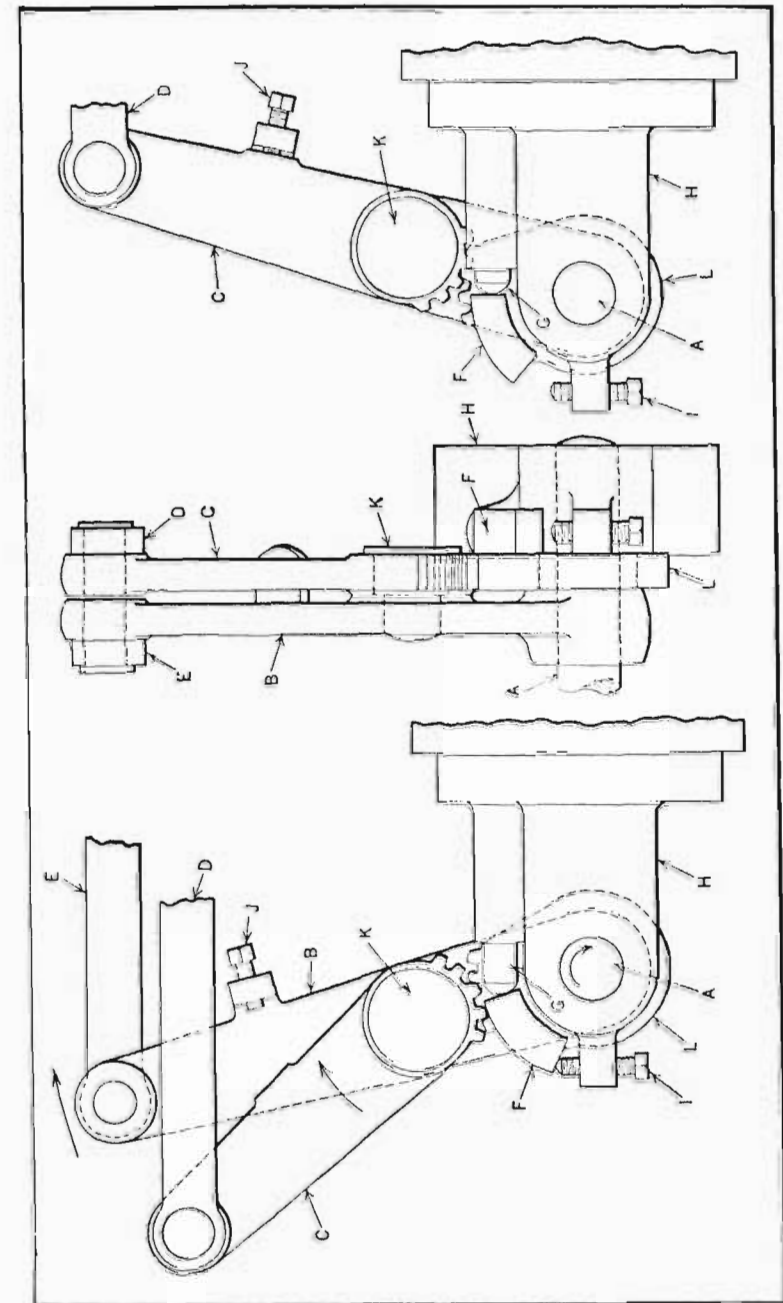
Mechanism for Operating Wire-forming Machine Slides having Unequal Strokes and Synchronized Movements During Part of Stroke only
